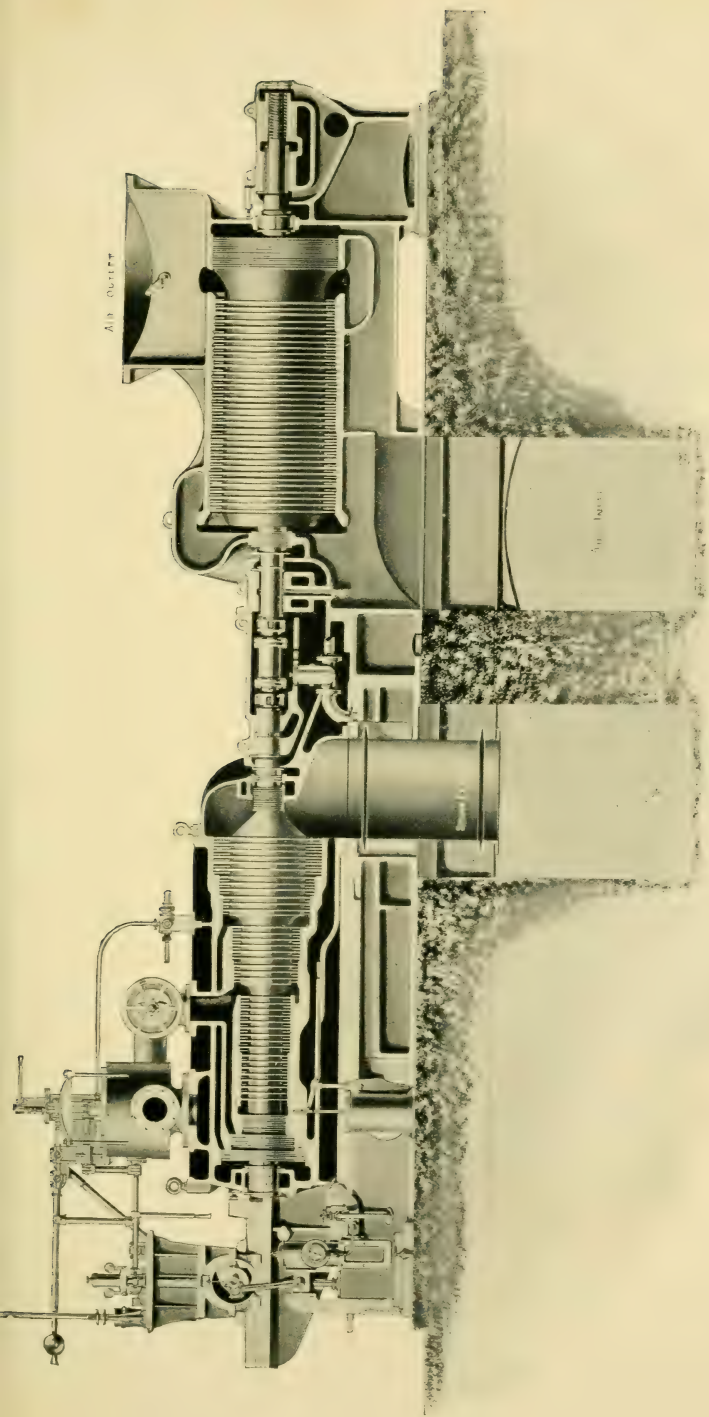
TURBO-BLOWING ENGINE. SECTION THROUGH STEAM AND AIR TURBINE CYLINDERS.
